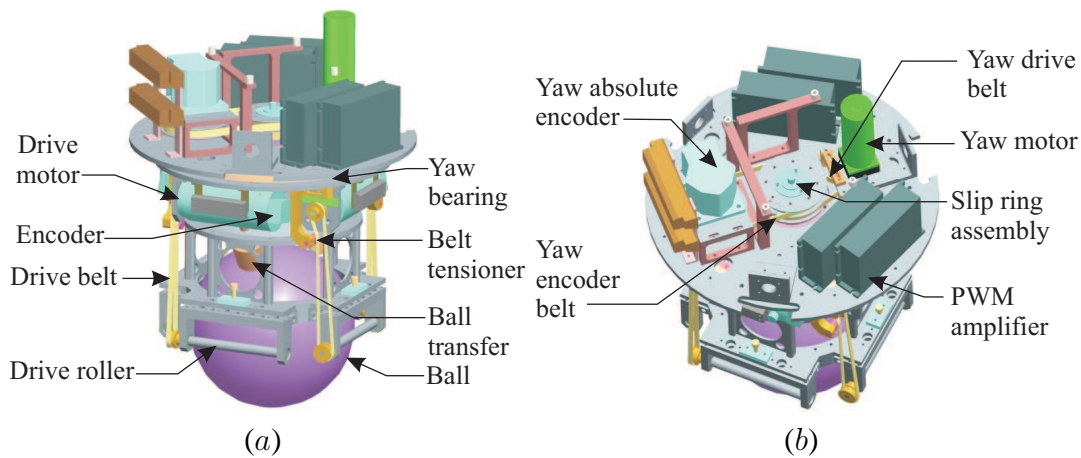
Four-motor inverse mouse-ball drive and yaw drive: (a) view showing main drive arrangement, (b) view showing yaw drive mechanism. (Courtesy: Ralph Hollis; Appeared in [76, 80])
